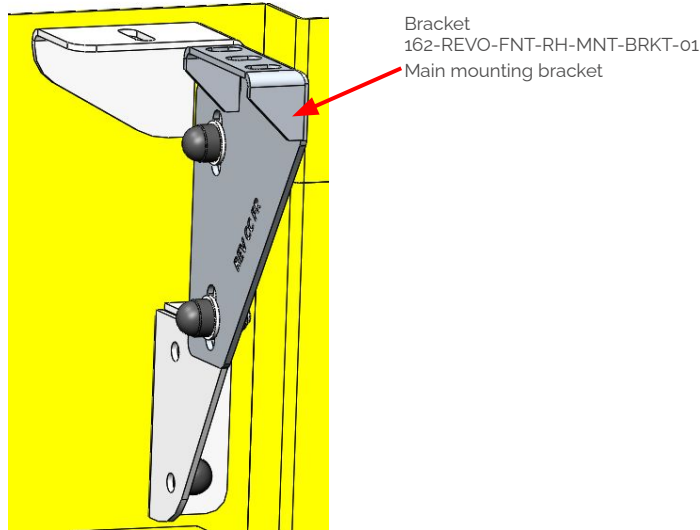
Reverse the main mounting brackets - Use the bracket labeled "Front Left" on the right side of the vehicle, and the bracket labeled "Front Right" on the left side of the vehicle"
